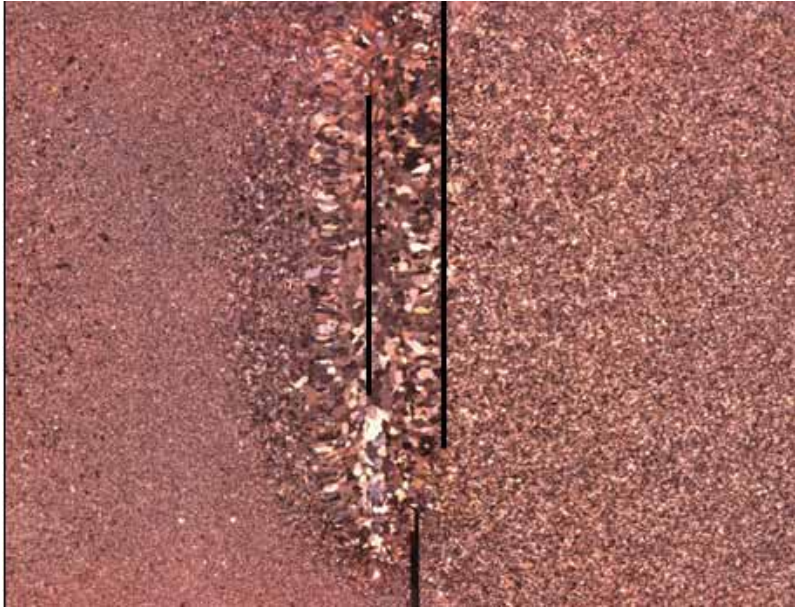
Macrograph of the transverse section of an EB weld. Tube material is on the left side and lid material on the right side. The large grain size of the weld can be clearly seen. Fracture locations are marked with black lines. Thickness of the joint is 50 mm.
